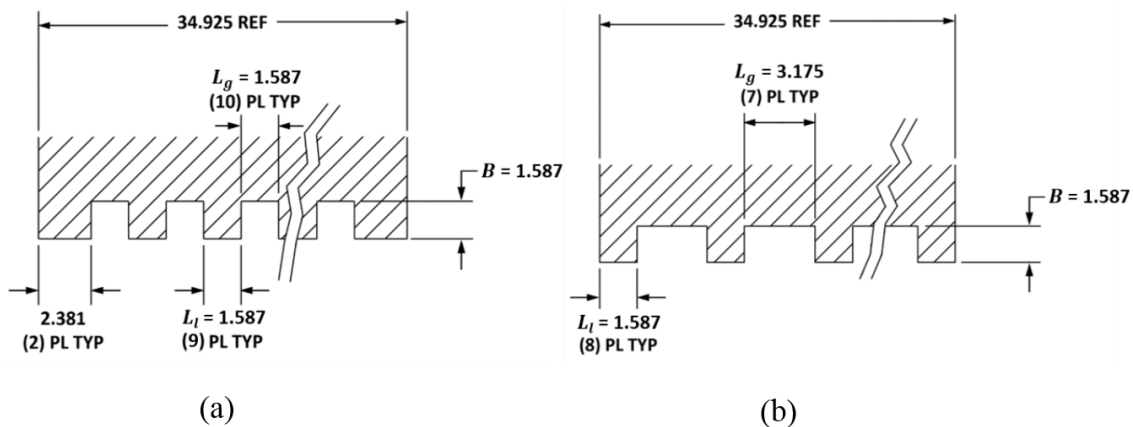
Groove dimensions (mm) for (a) finely-grooved and (b) coarsely-grooved seals. Adapted from [19].
